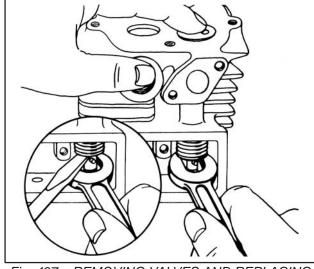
REMOVING VALVES AND REPLACING VALVES
